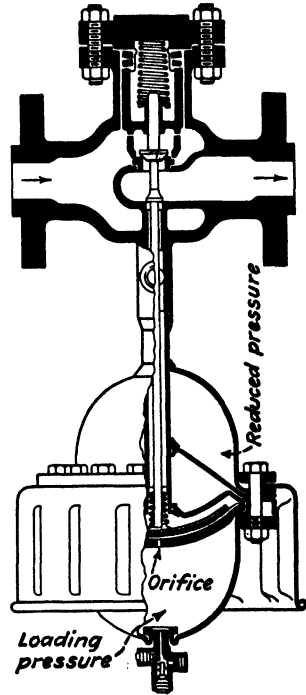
Dome-loaded unit uses pressure-tight sleeve instead of packing gland. (Courtesy of Grove Regulator Co.)
